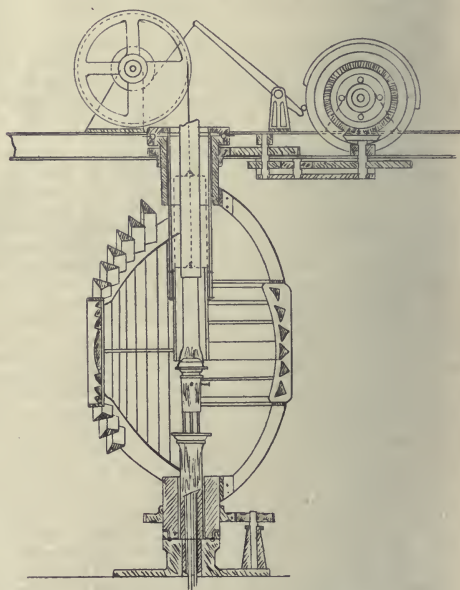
Spindle eclipsing apparatus. (Section.)
